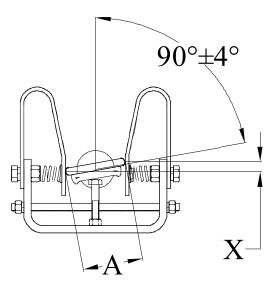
END VIEW SHOWING BLADE CONTACT ANGLE
